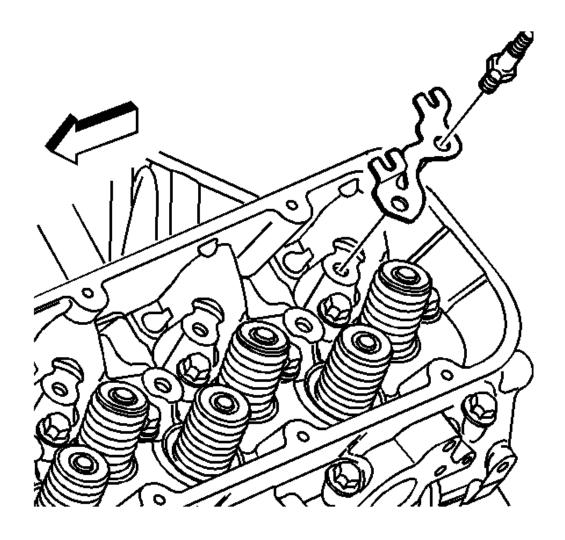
View Of Valve Rocker Arm Studs & Pushrod Guides Courtesy of GENERAL MOTORS CORP.
